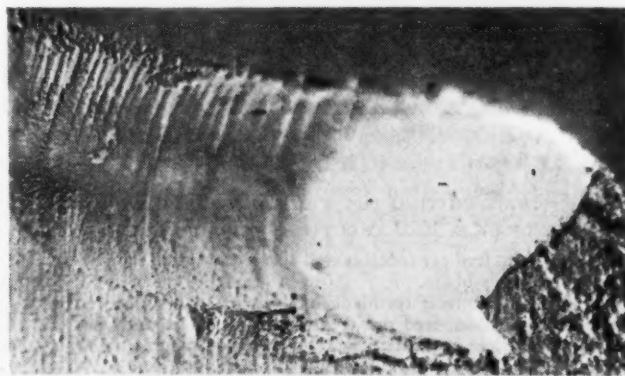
CUTTING EDGE AND CHIPS FORMED AT 3280 FPM
